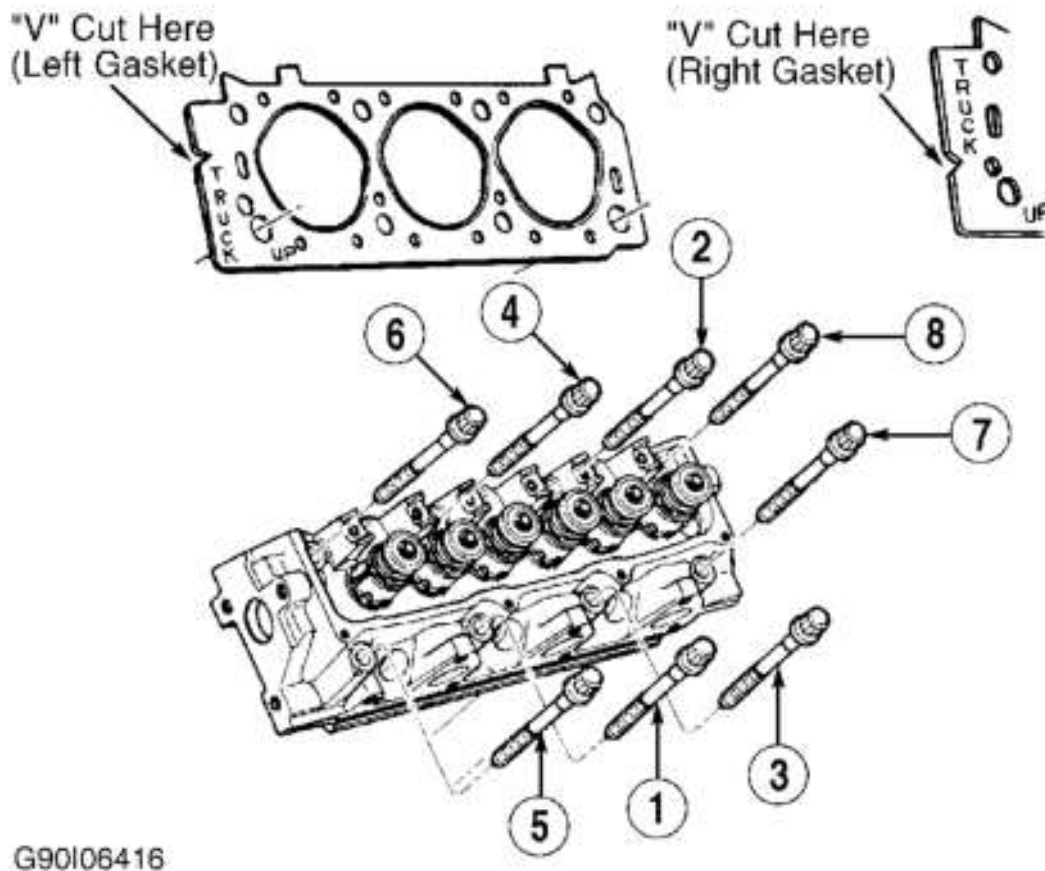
Cylinder Head Gasket Position & Head Bolt Tightening Sequence
